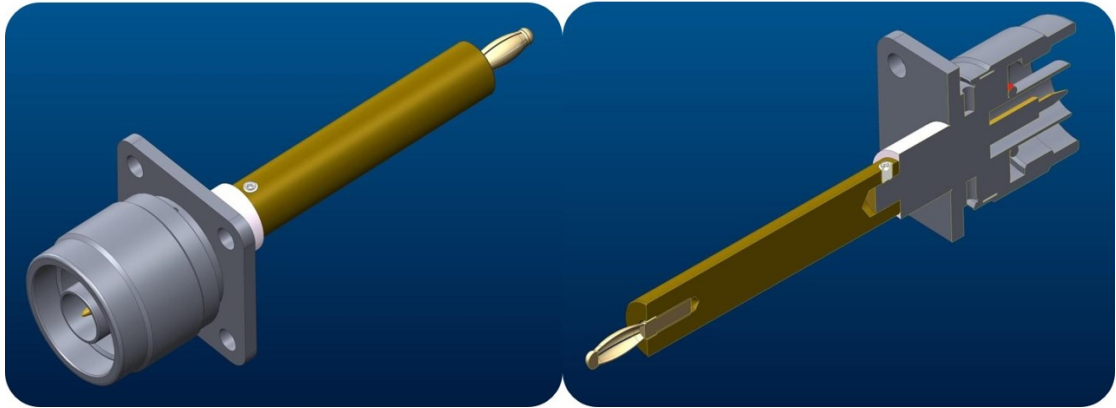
Antenna assembly schematic with a gold plated multilam plug electrically connecting the antenna to the DR WG.
